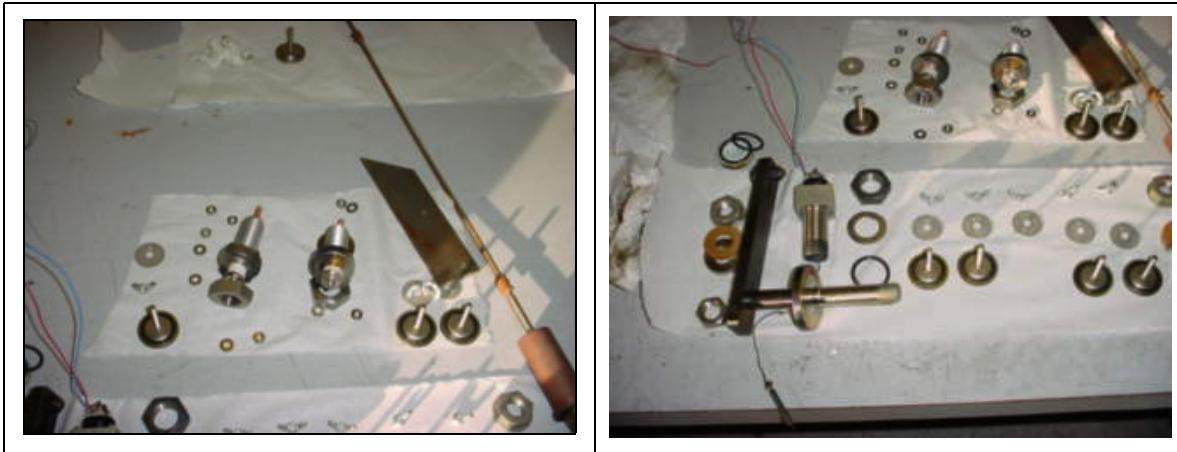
High voltage contact with electrode feedthrough showing location of washers, nuts, and bolts (picture found useful for reassembly)
